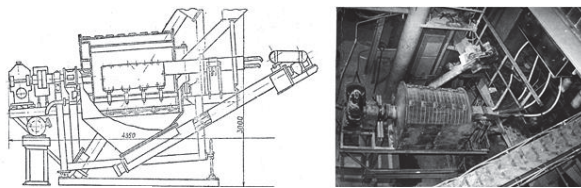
Cutaway and side view of grinding machine with a drum screen
